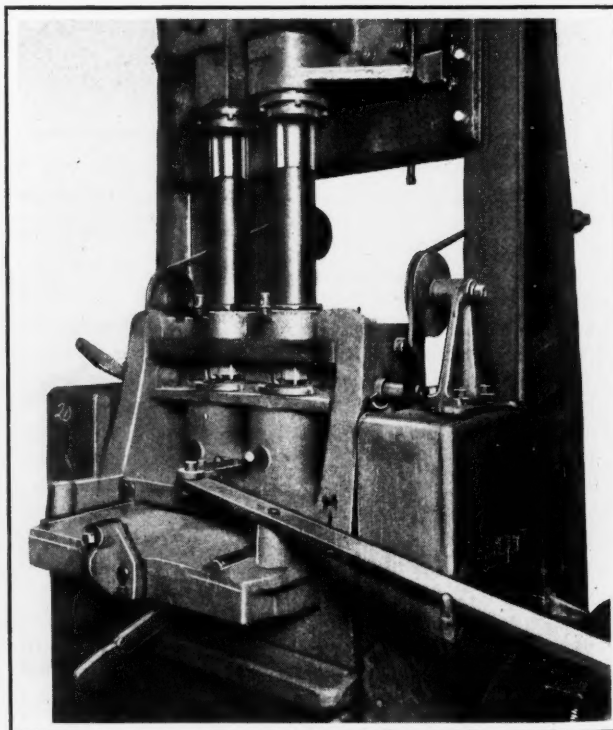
Jig used in reaming the Bore of Two Cylinder Sleeves at One Time
